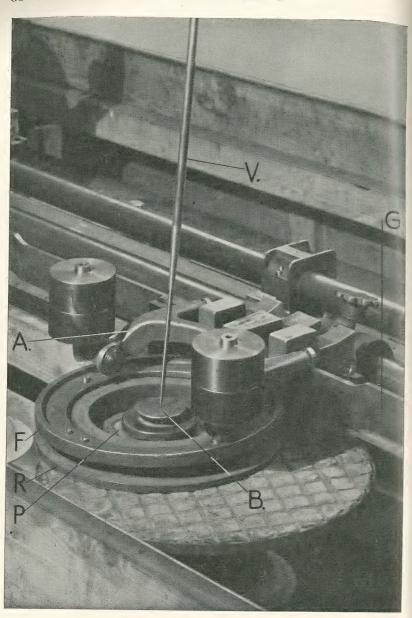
Detail of Single Surface Machine for high accuracy. (Hilger.)
